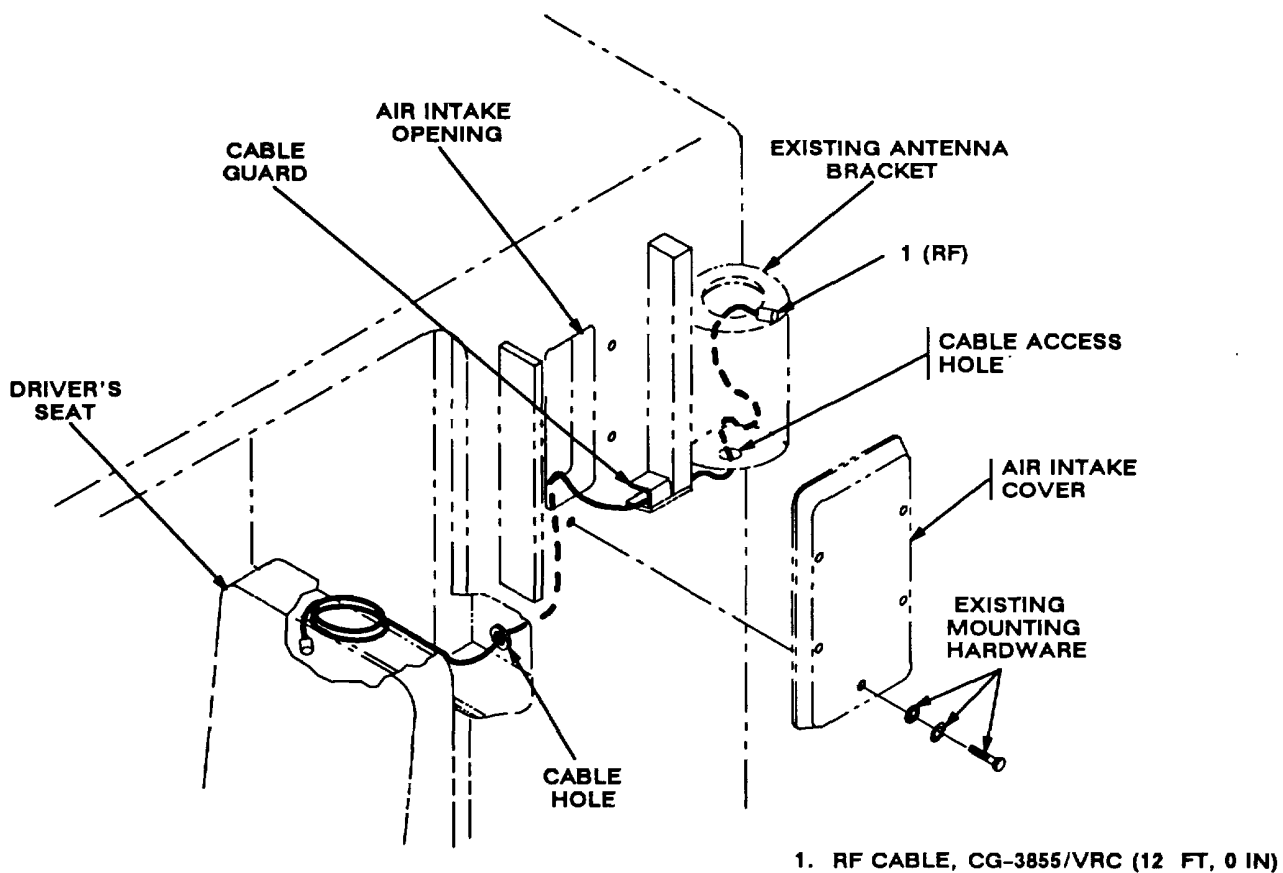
(1). Cable Installation: Roadside RF Cabling
